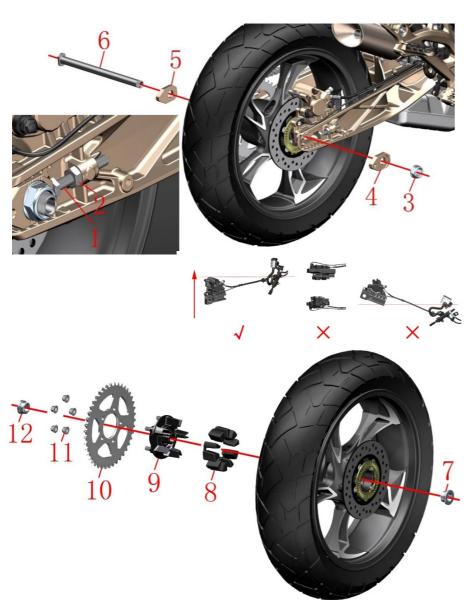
Rear wheel, swinging arm component		Rear wheel component 1	CHK	401
